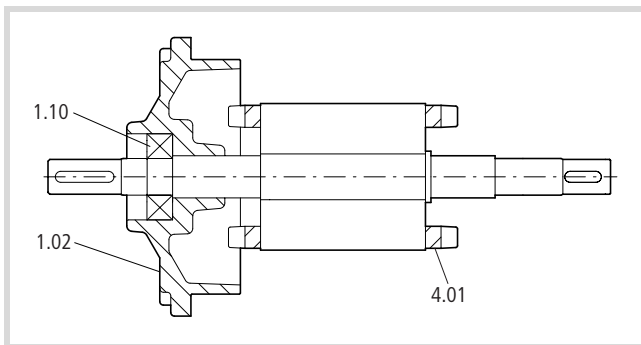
Rotor (4.01) with DE roller bearing (1.10) and DE end shield (1.02)
